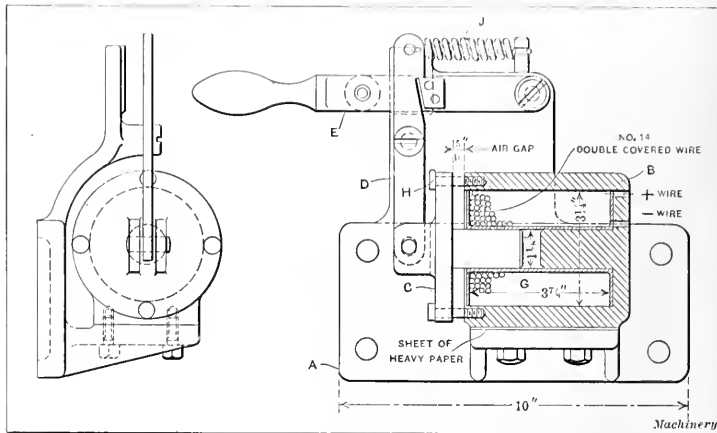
End and Cross-sectional Views of Electromagnetic Controller
